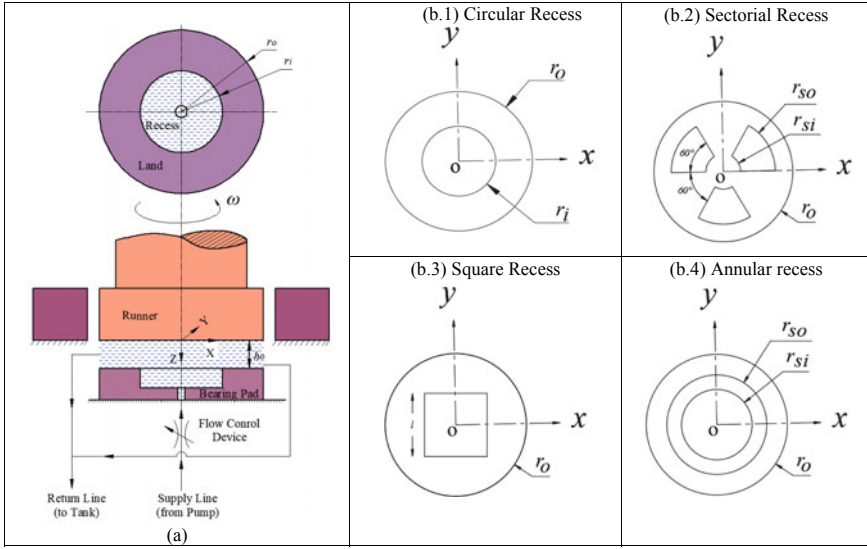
a Layout of hydrostatic thrust bearing. b Recess geometric details
